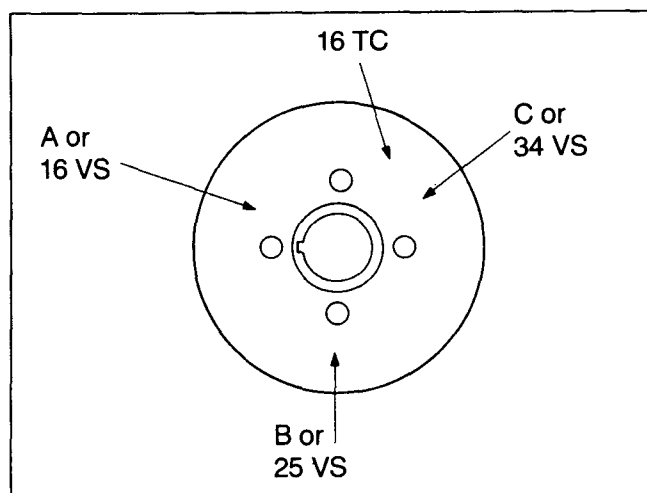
, (N114230). Accessory drive pulley marking — N-855
